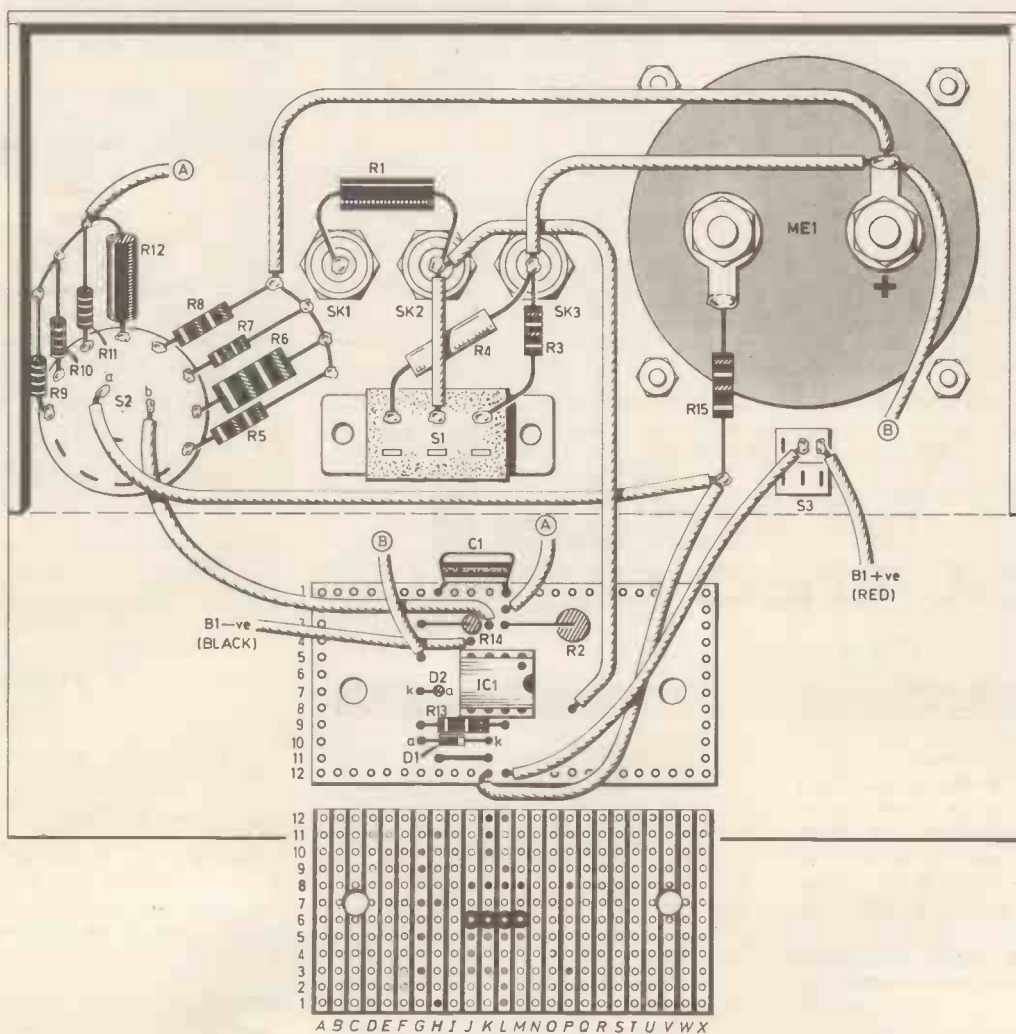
Wiring diagram and stripboard layout. Many components are mounted directly onto the switches and sockets and this must be done with care to avoid leads shorting on the aluminium case. The finished board assembly is mounted onto one side of the case (shown folded flat for clarity) with short spacers.
